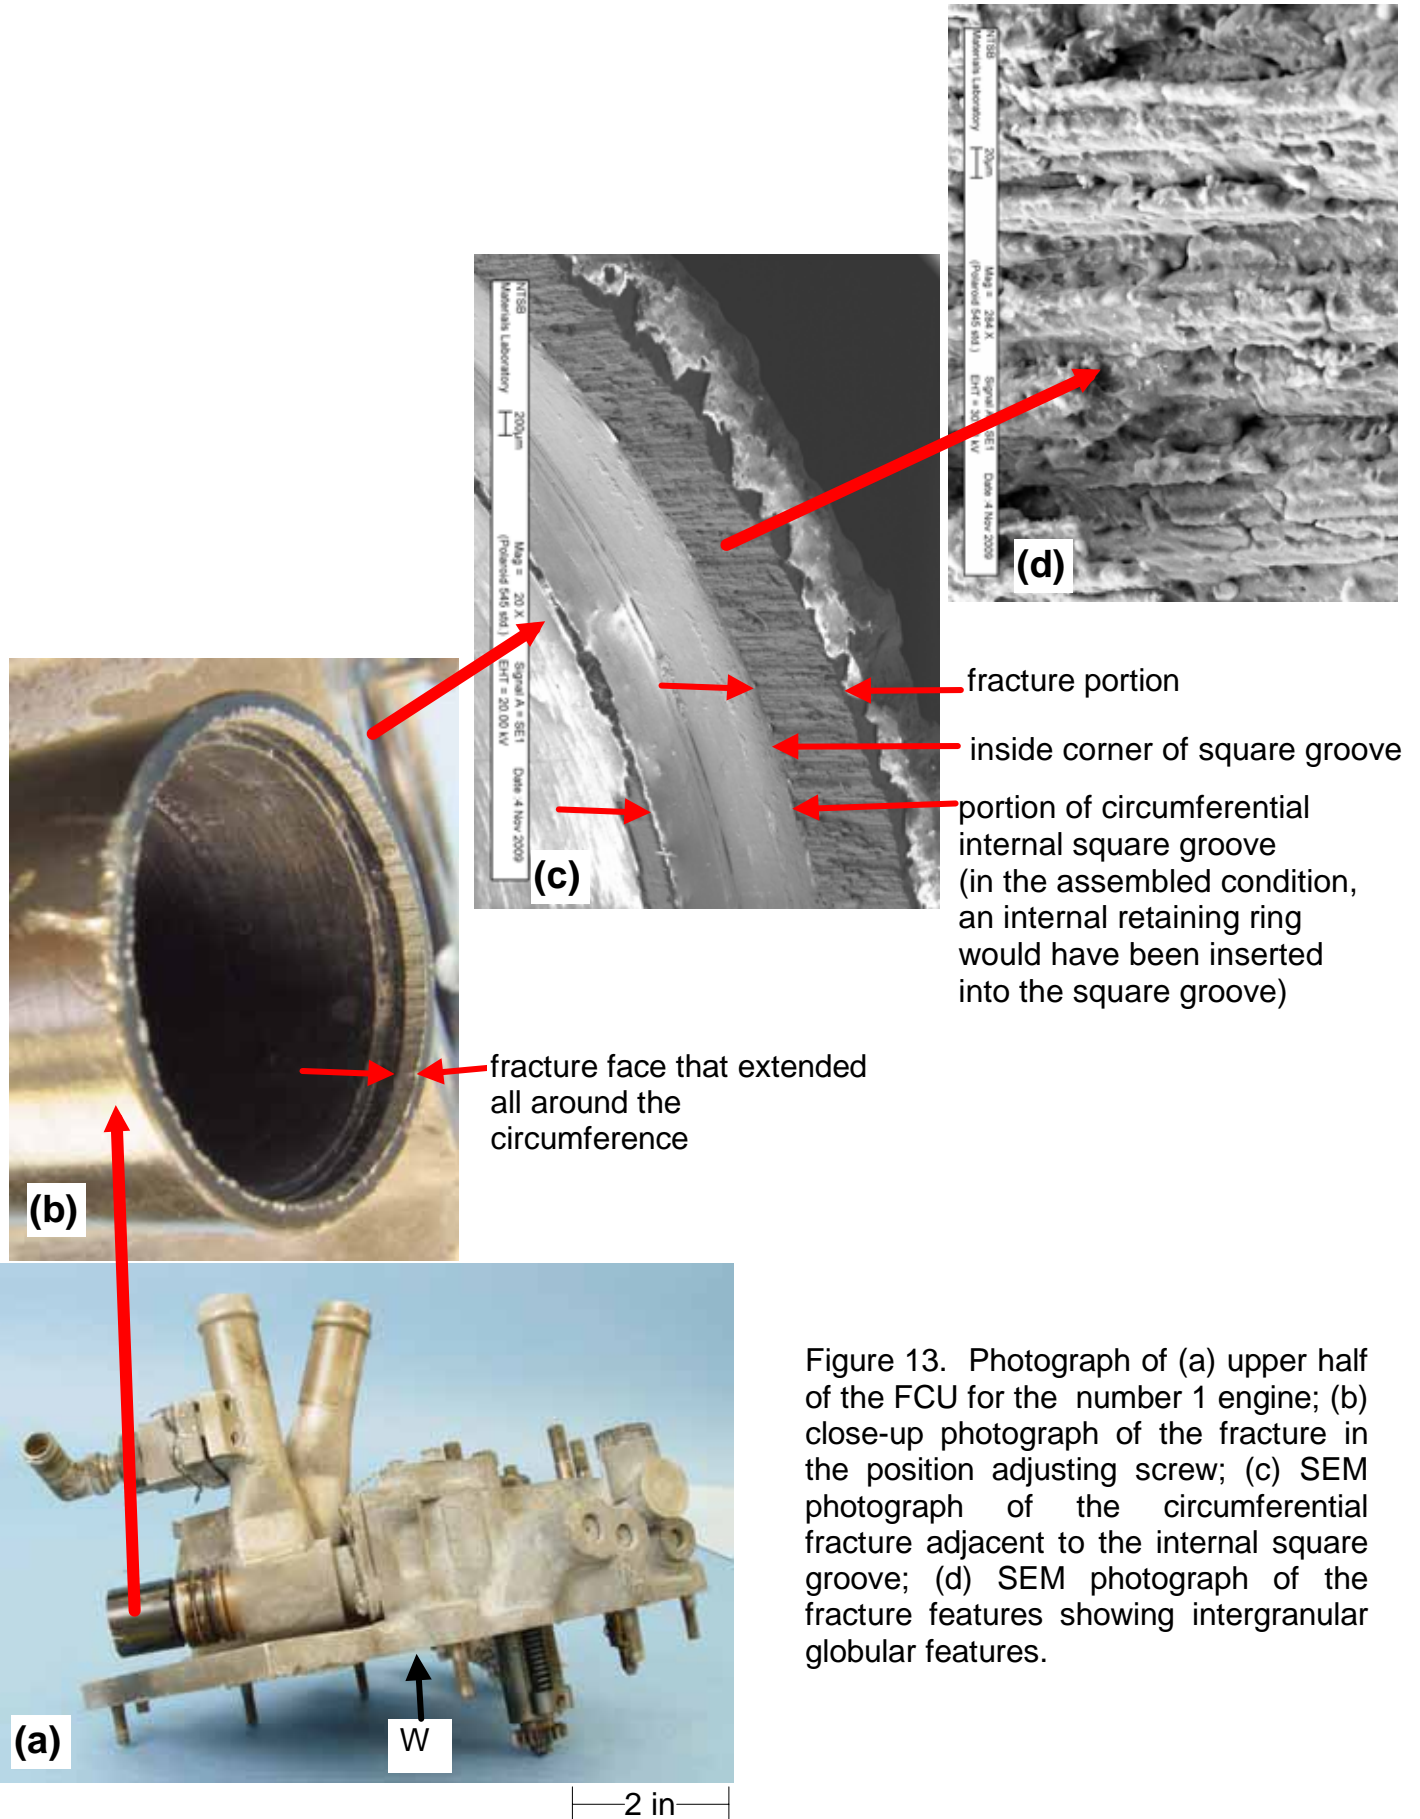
Photograph of (a) upper half of the FCU for the number 1 engine; (b) close-up photograph of the fracture in the position adjusting screw; (c) SEM photograph of the circumferential fracture adjacent to the internal square groove; (d) SEM photograph of the fracture features showing intergranular globular features.
